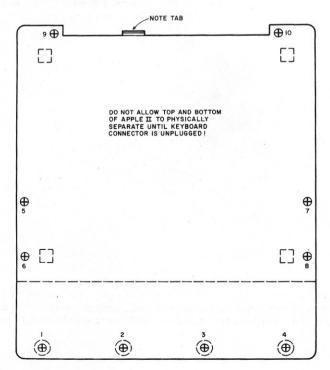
To disassemble your Apple II, remove only the screws shown here.
